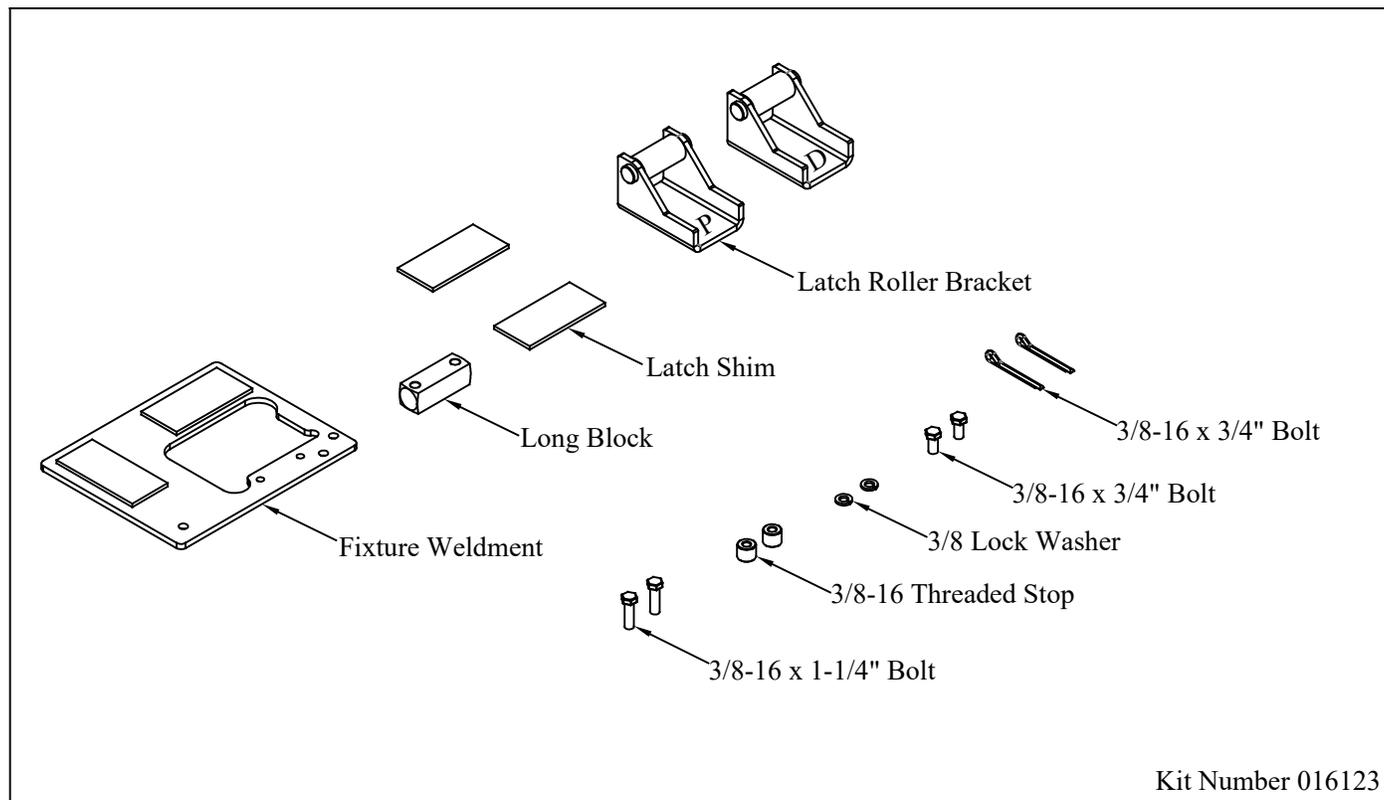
Replacement Parts and Weld Fixture Identification
